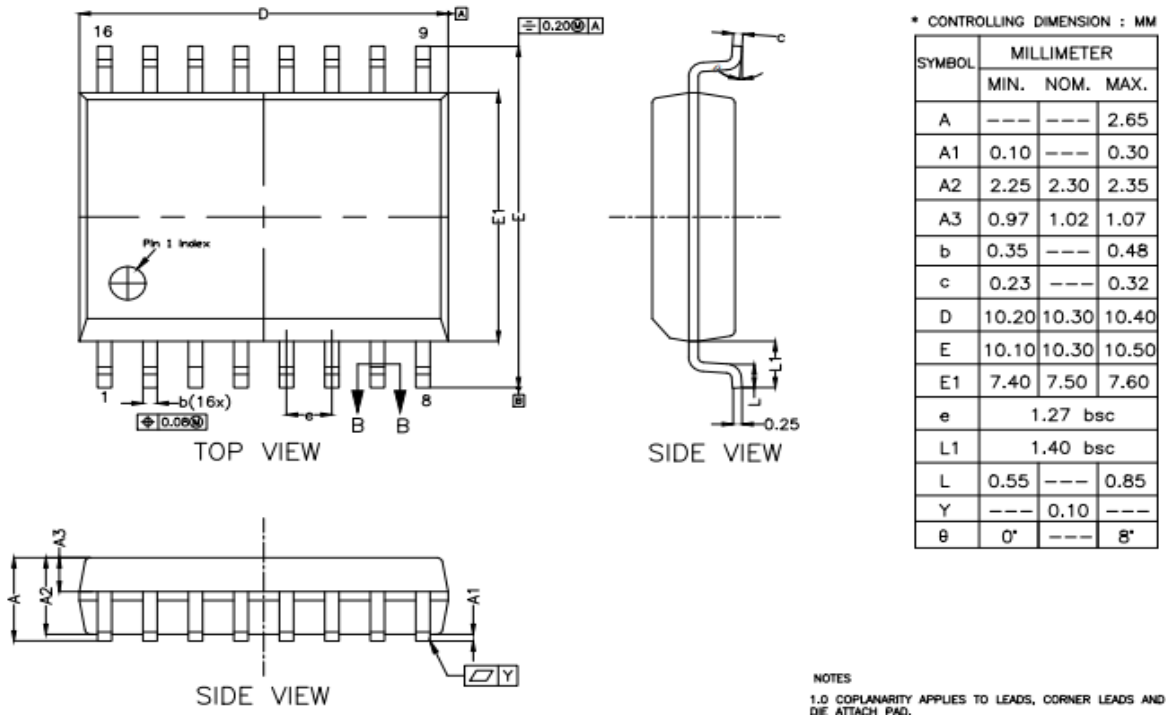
SOW16 Package Shape and Dimension in millimeters
